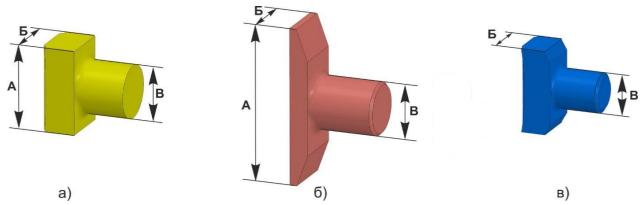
Gear-shift yoke T-blocks: \mathbf{a} – 3 and 4, 5 and 6 gear shift yoke T-block; \mathbf{b} – 1 and 2 gear shift yoke T- block; \mathbf{c} – reverse gear shift yoke T-block. T-block dimensions:
